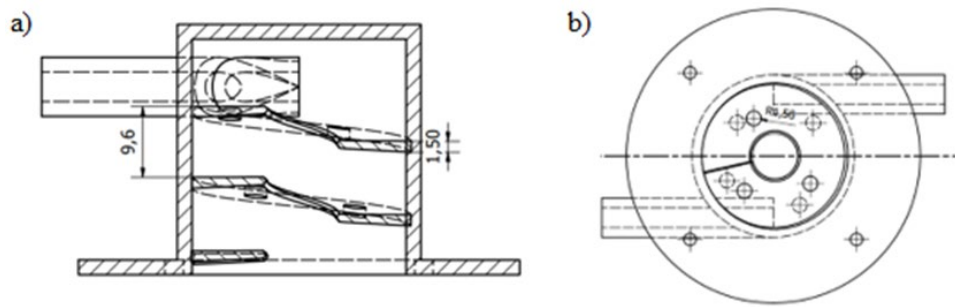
The chamber of an atomizer with insert set No. 3: a) cross-section, b) bottom view
